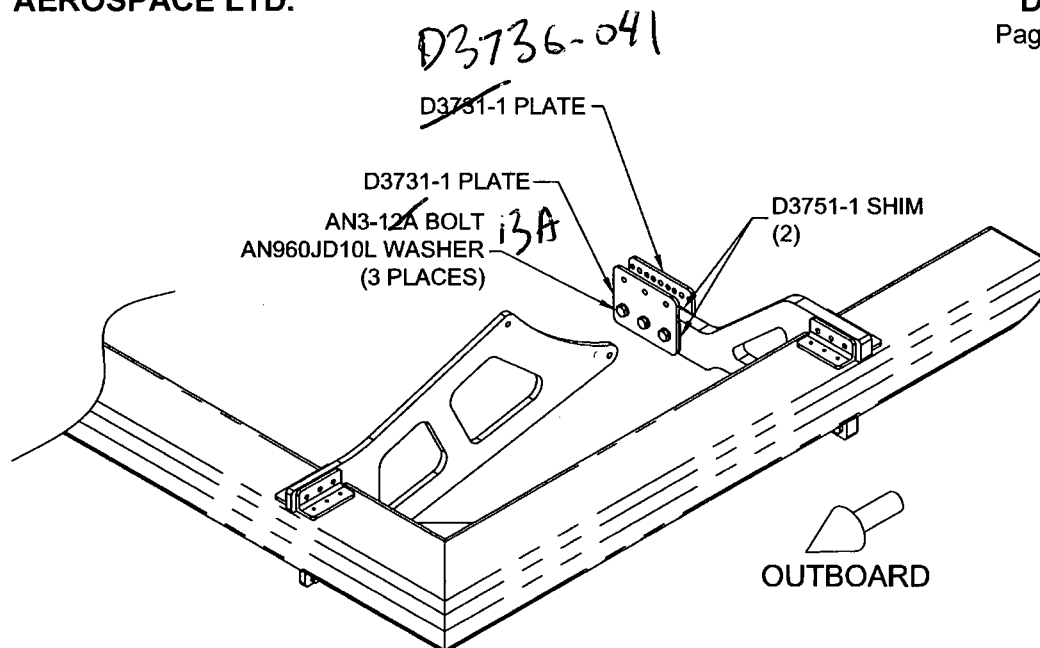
Detail 'G' Strut to Basket Attachment
